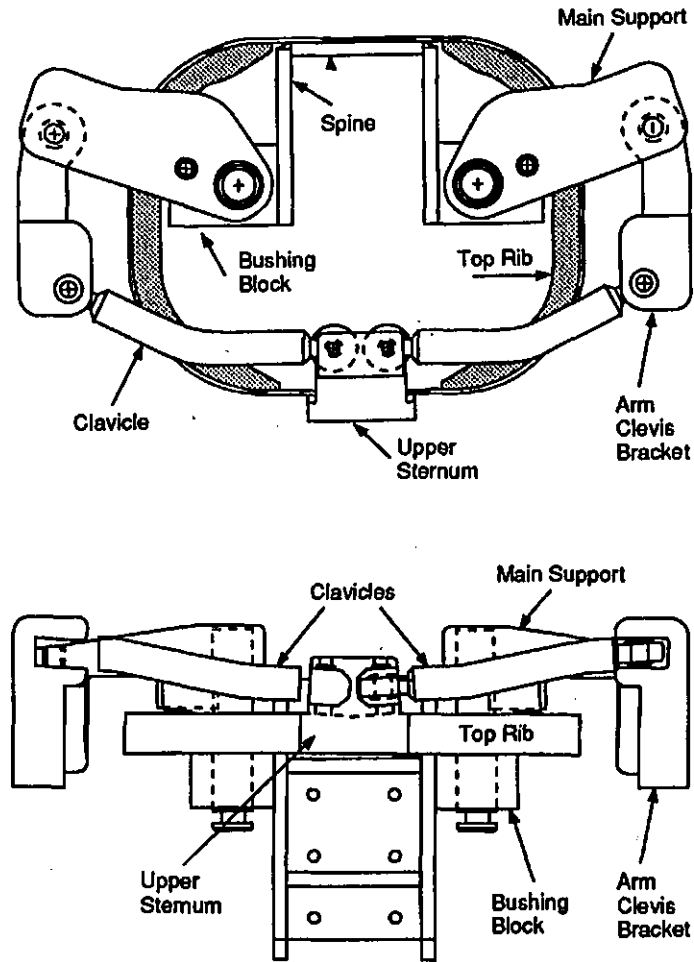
Top- and front-view drawings of final shoulder design concept used in First and Second Prototype-50M.
